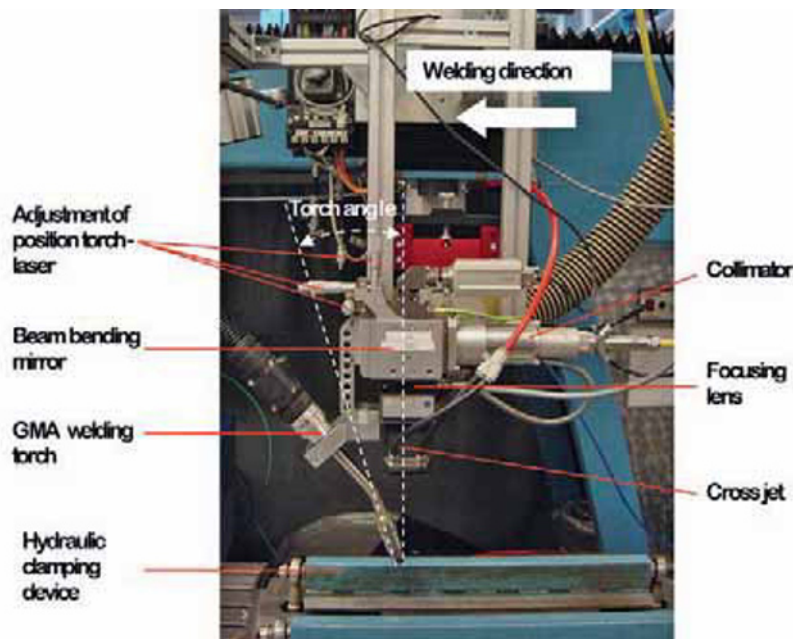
Experimental setup for laser-GMA-hybrid welding with 8 kW
